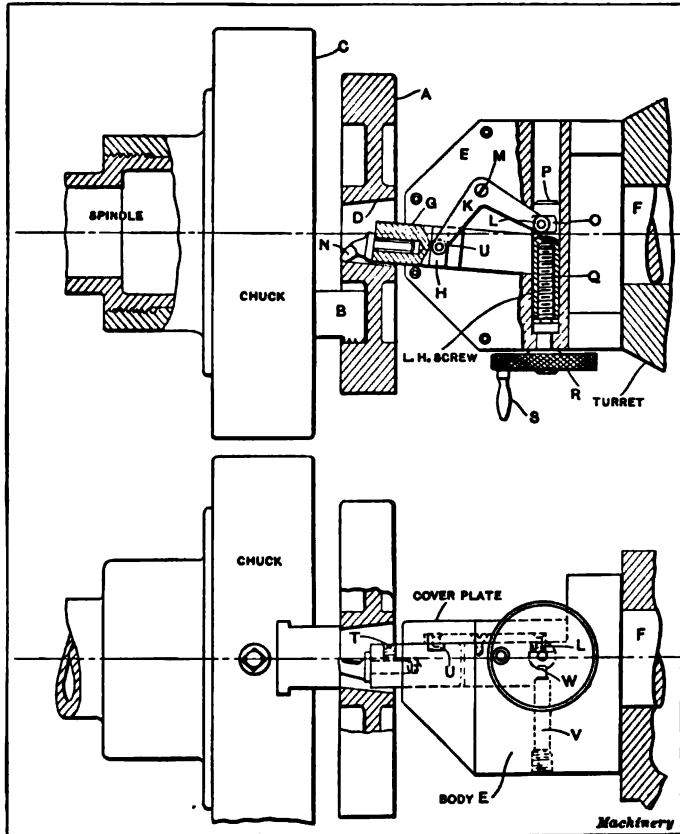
Attachment for Generating Small Taper Hole in a Motor Cycle Flywheel
